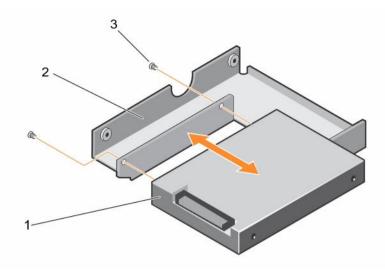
Removing and installing a 2.5-inch hot swappable hard drive into a 3.5-inch hard drive adapter
